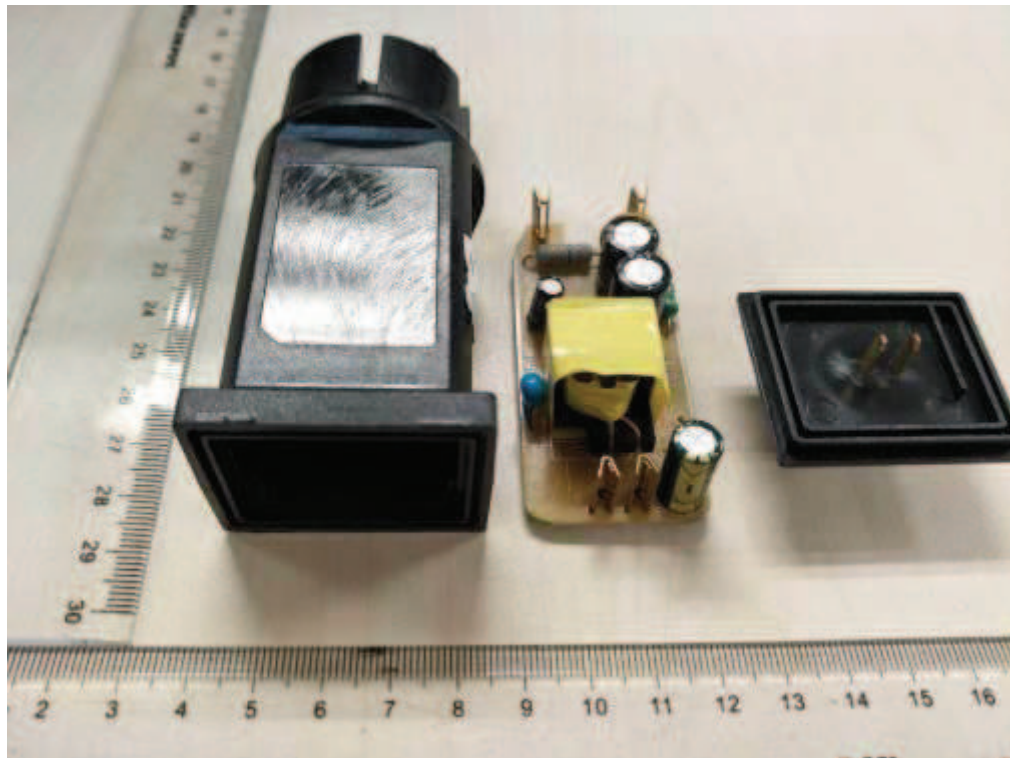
Internal view of RKPO-EUxxxxxyDP-2A
